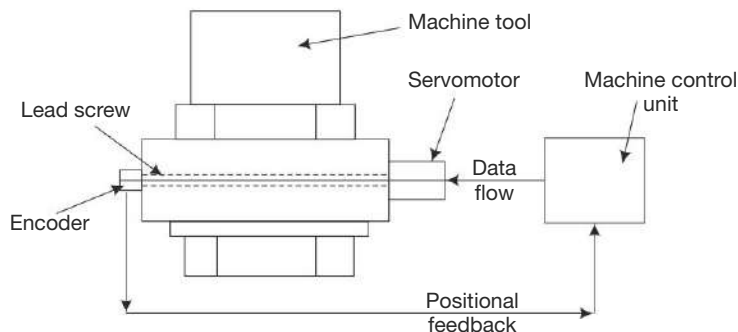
The encoder disc mounted on the lead screw for rotary position measurement
